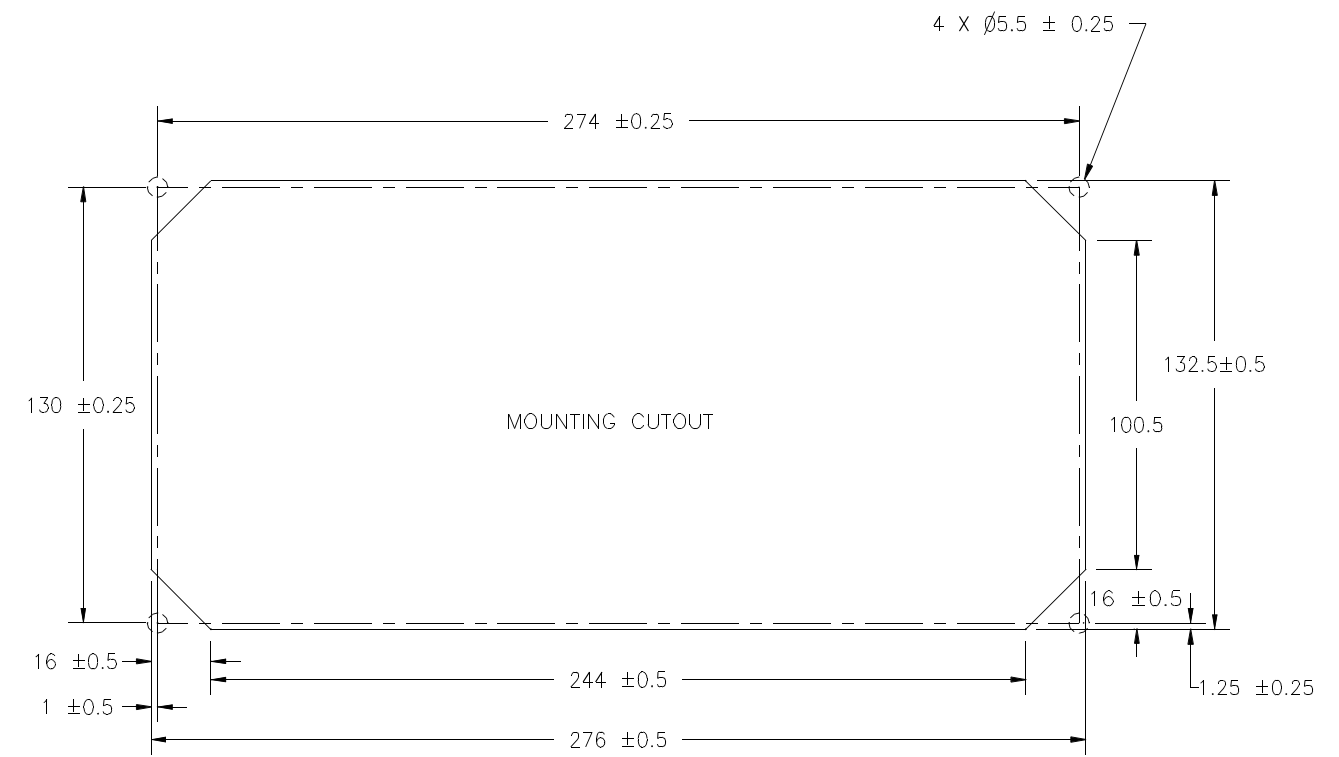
MK 37 VT System Mechanical Installation Drawing (Sheet 1 of 5)
